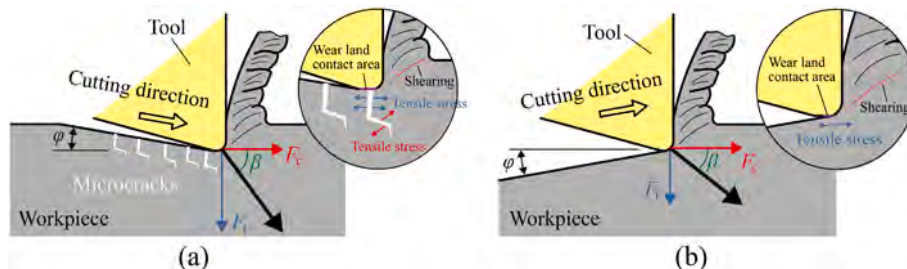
Schematics of surface formation during cutting a spherical dimple: (a) the tool in the cut-in area, and (b) the tool in the cut-out area.
